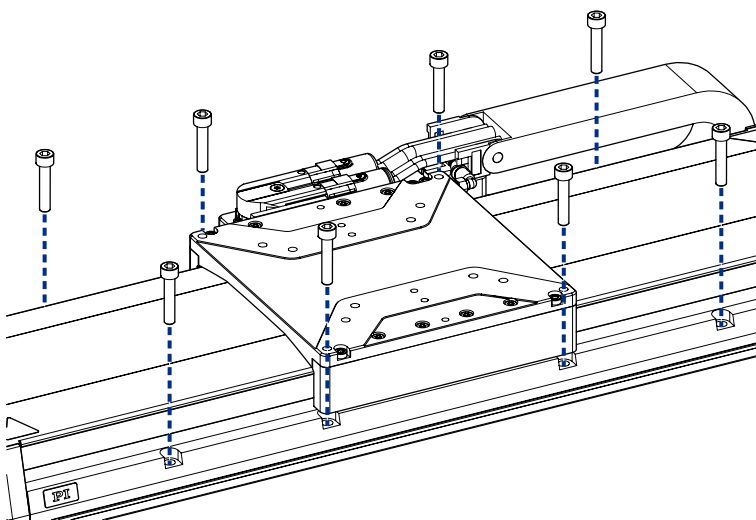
Mounting the V-417.xx6211E1 onto an underlying surface
